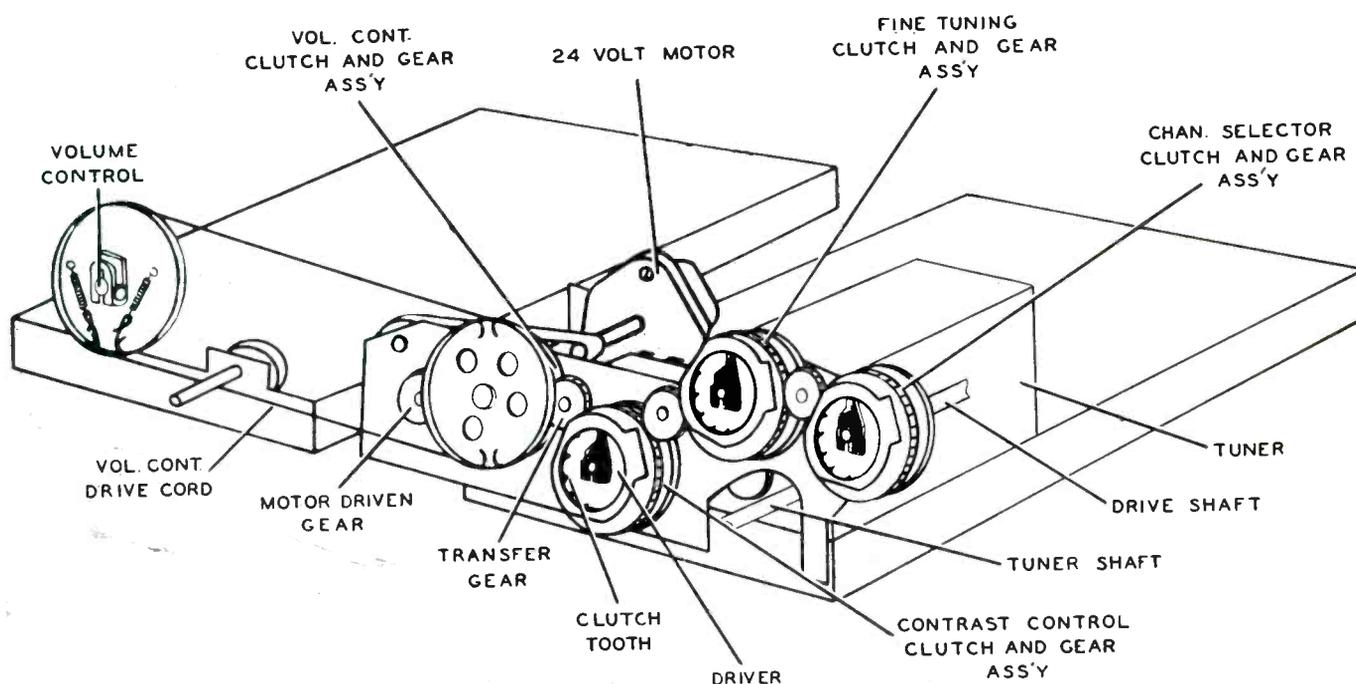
View of the gear and clutch assembly, looking at the front of the chassis.
